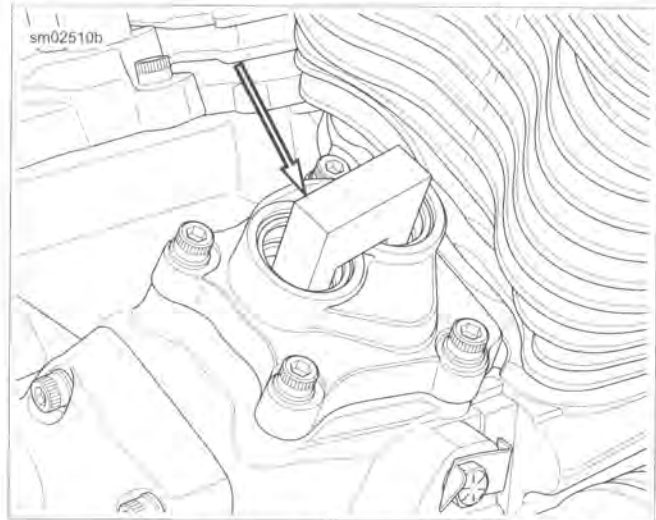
SCREAMIN' EAGLE Magnetic Lifter Holder
